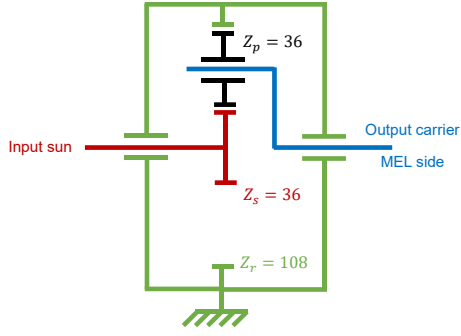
Illustration of the epicyclic gearbox installed on TURBOLAB test rig
